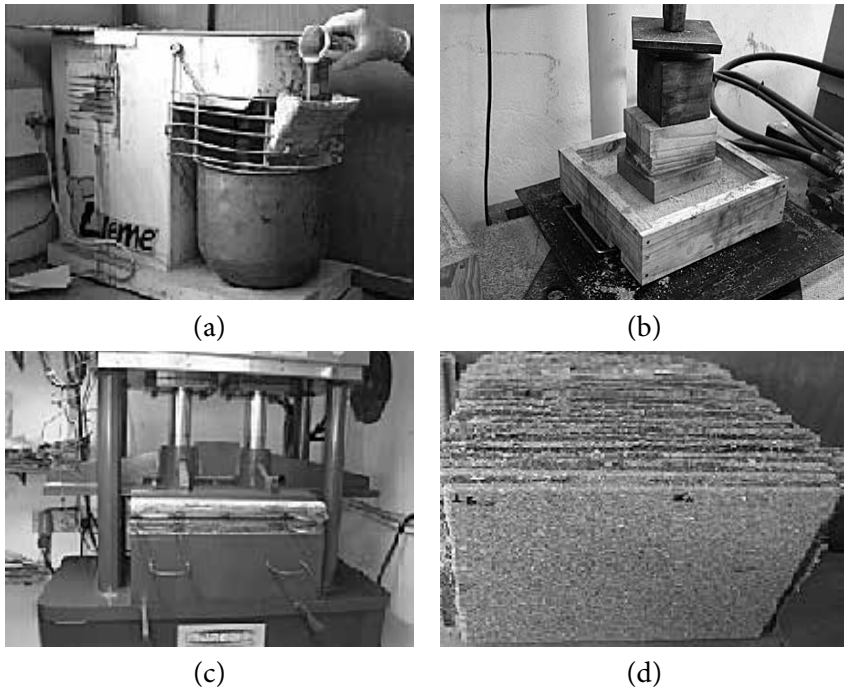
(a) equipment that mixes the resin and particles, (b) pre-press machine (c) hydraulic press machine and (d) the final manufactured panels.
